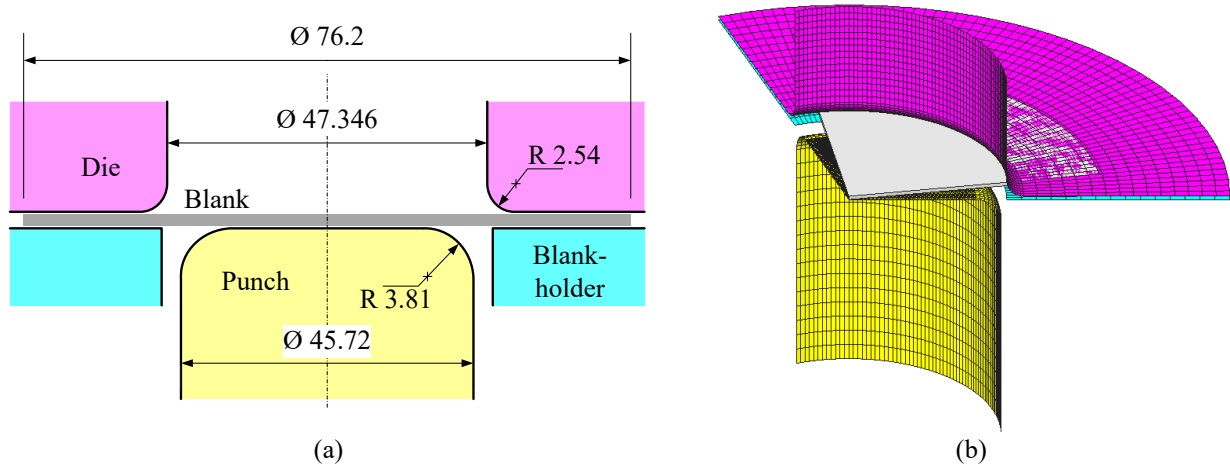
Definition of the forming process for a cylindrical cup: (a) main dimensions [mm] of the forming tools; (b) discretization of the forming tools using Nagata patches.
